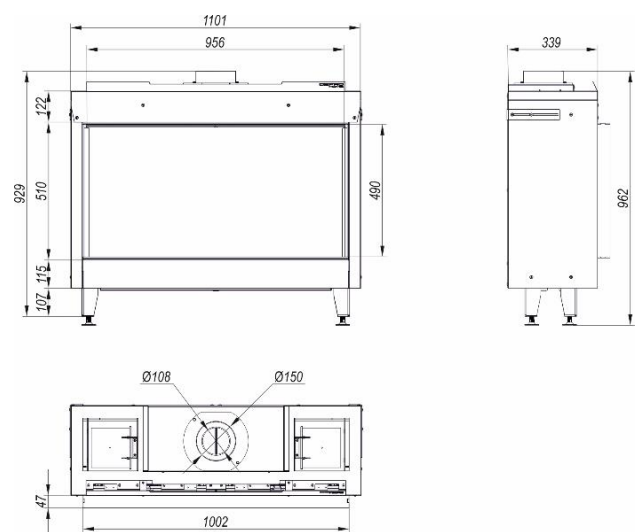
Dimensions of DEFRO HOME VITAL 37 M.
